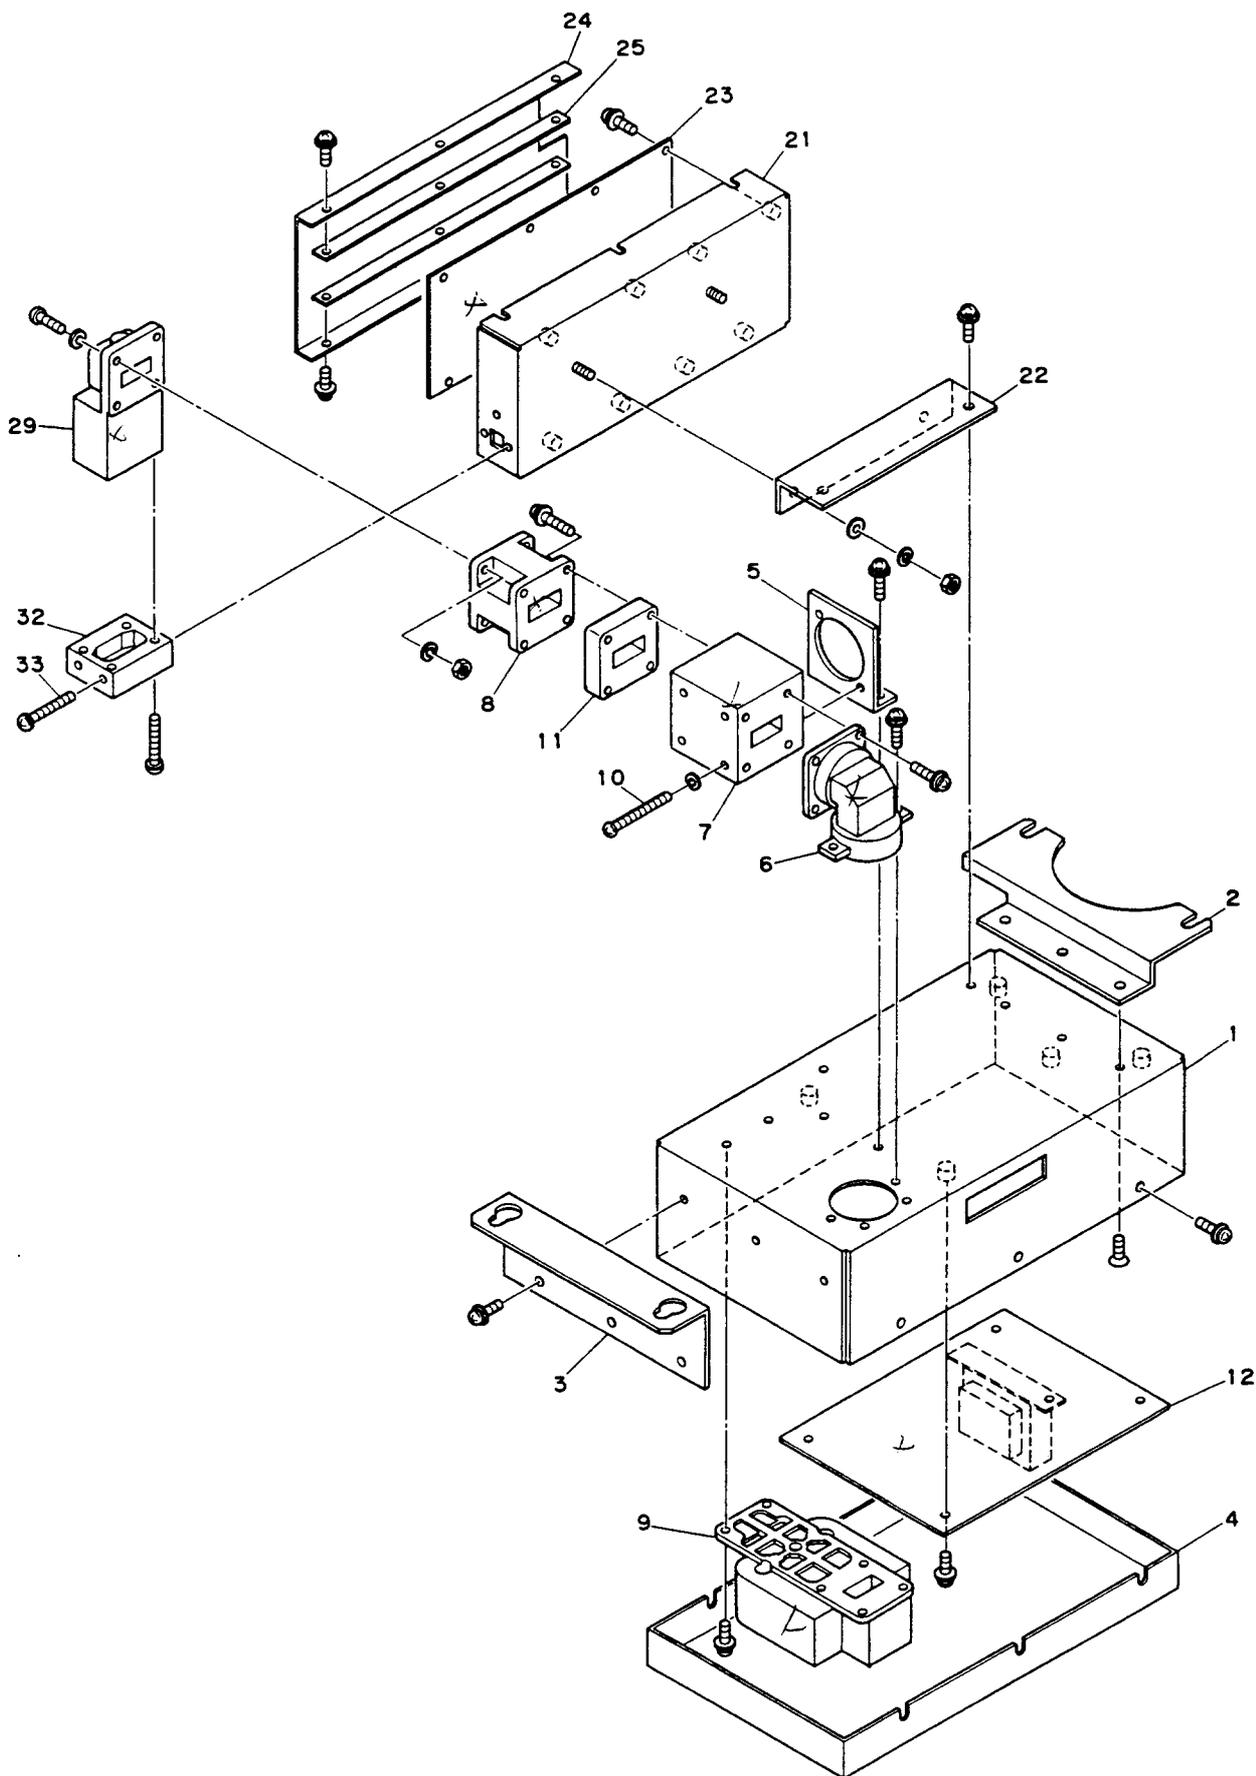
ASSEMBLY DRAWING OF OPEN ARRAY SCANNER UNIT (2/2)
